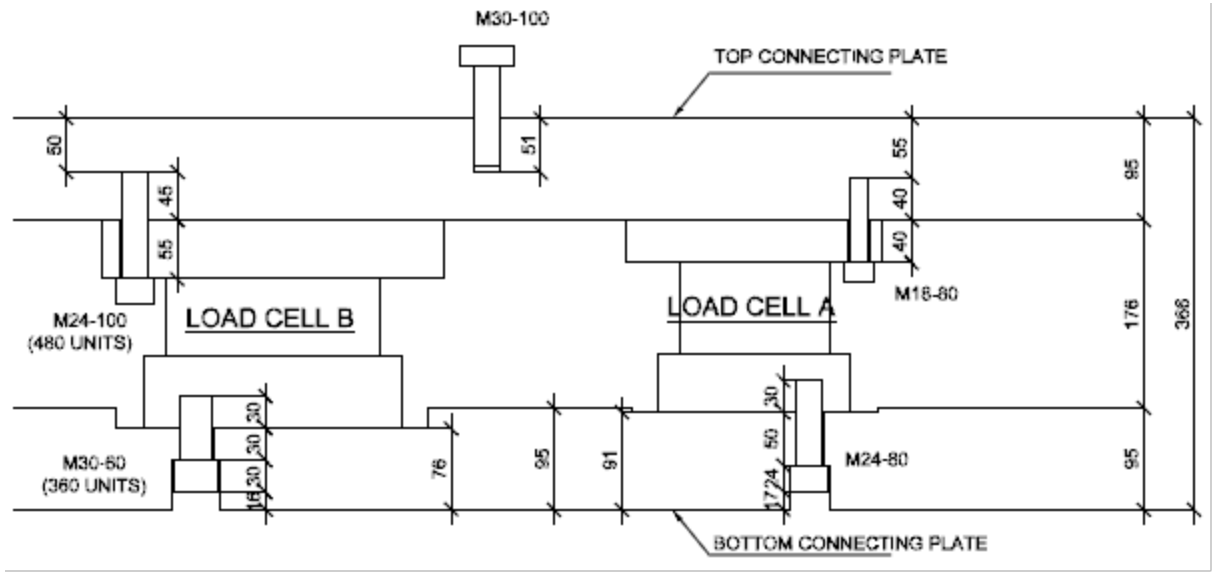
Connection of Type A and Type B load cells to top and bottom connection plates
